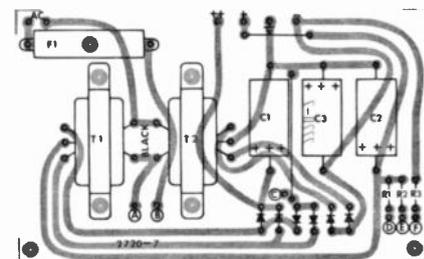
(far left) COMPLETE SCHEMATIC of the power supply. FIG. 2—(top of page) FOIL PATTERN for the power supply circuit board. FIG. 3—(above) PARTS PLACEMENT on the board.
